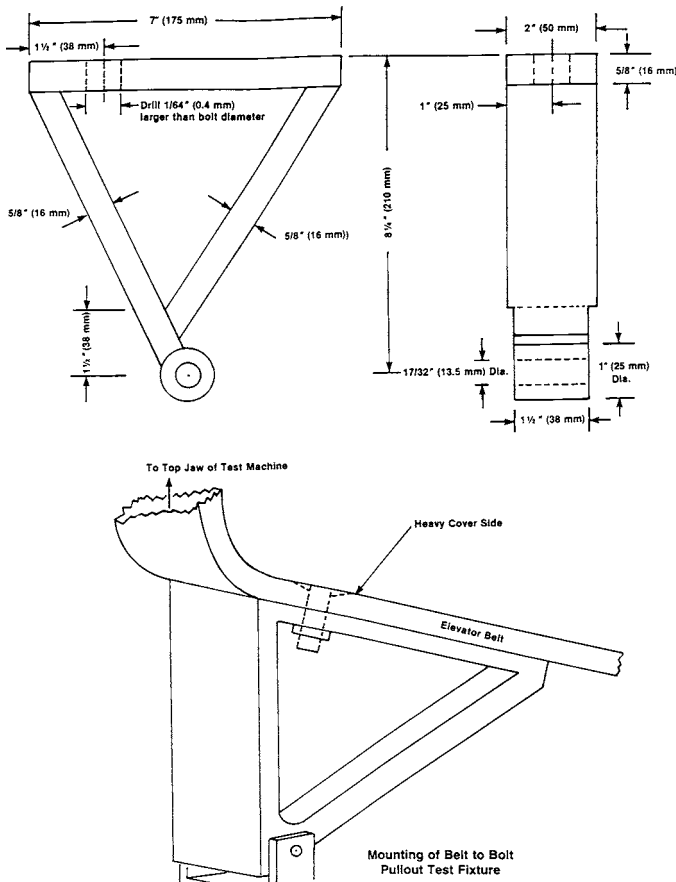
Fixture for Making Elevator Belt Bolt Pullout Test
